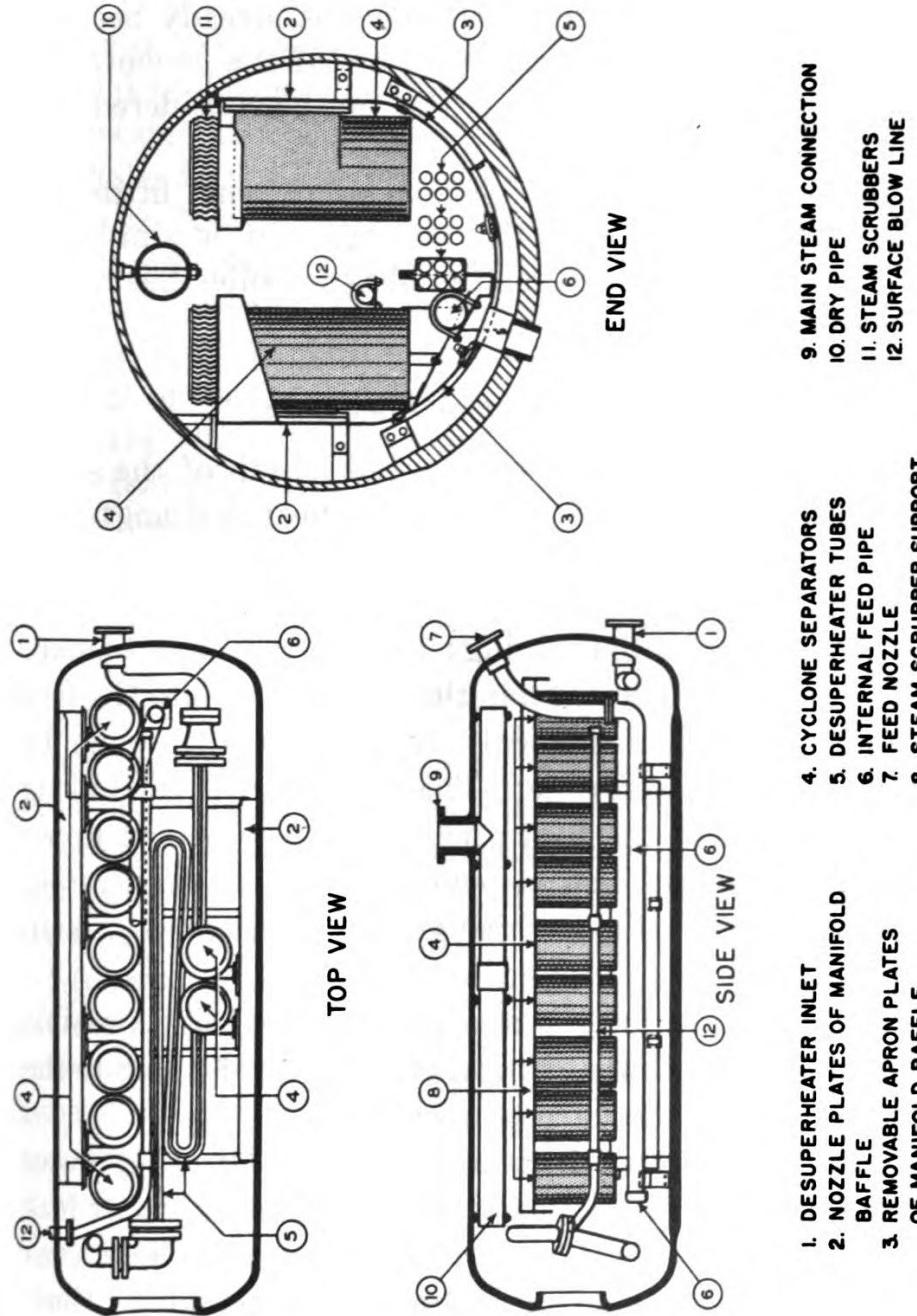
Cross sections showing internal fittings (destroyer escort boiler).
